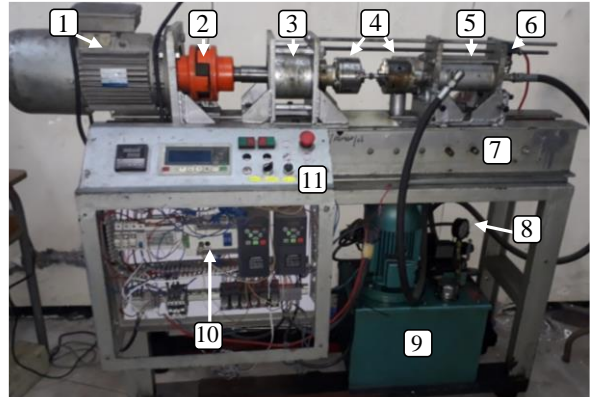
Friction welding machine: 1. Main rotating motor with brake, 2. Clutch, 3. Bearing collar, 4. Chucks, 5. Press, 6. Electronic pressure control, 7. Main body, 8. Hydraulic pressure control, 9. Hydraulic unit, 10. Control programmer, 11. Control unit box
